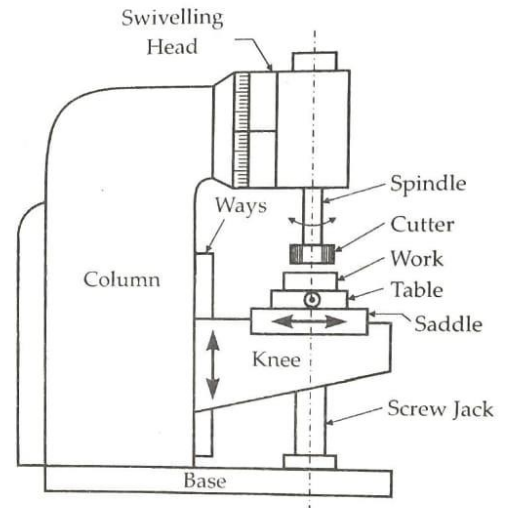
Vertical Milling Machine with Swivelling Head.
